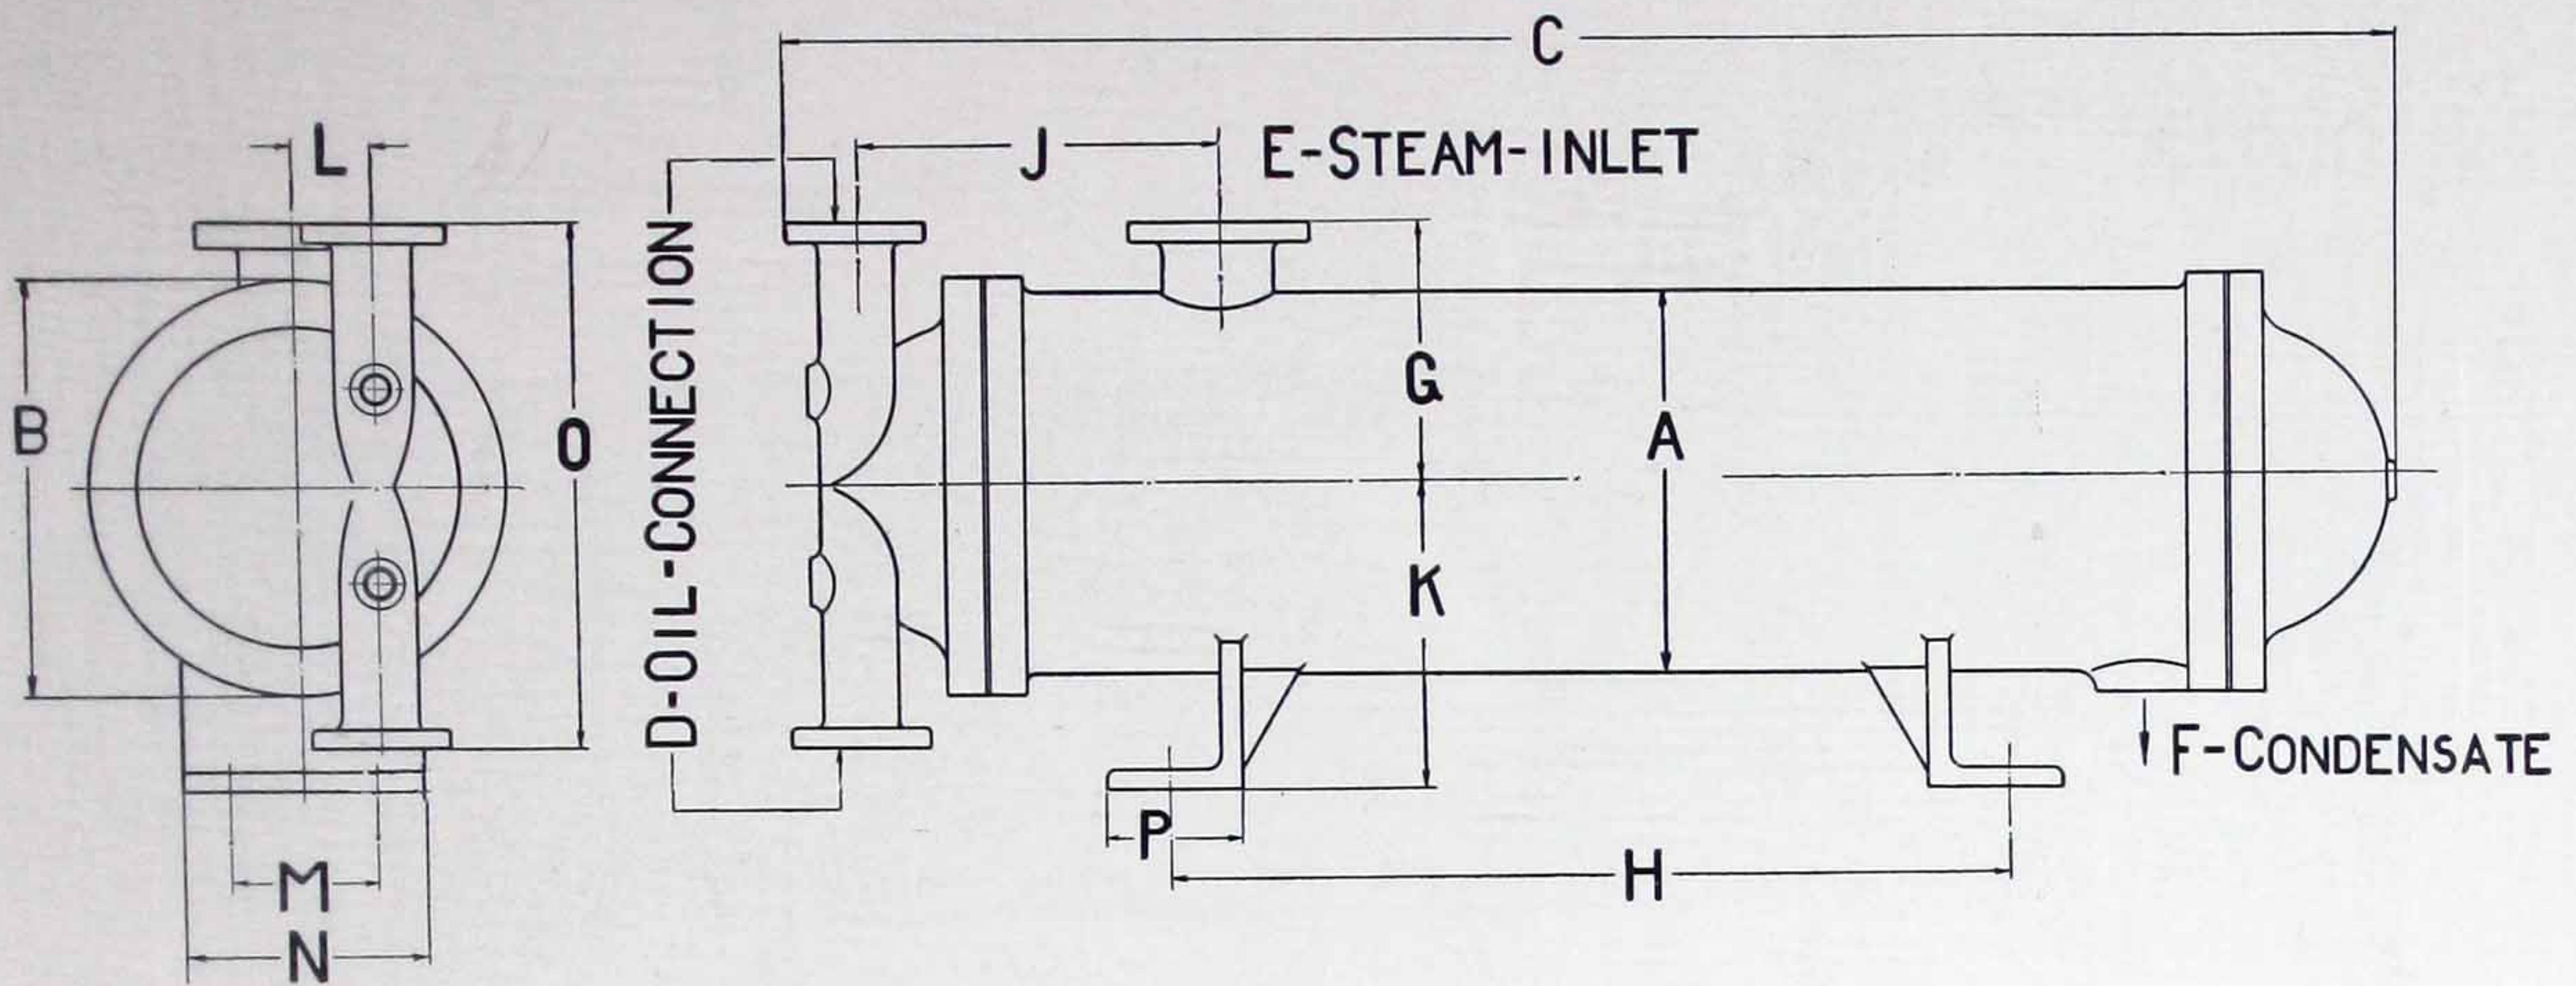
C. PRINCIPAL DIMENSIONS OF ½ FUEL OIL HEATER
